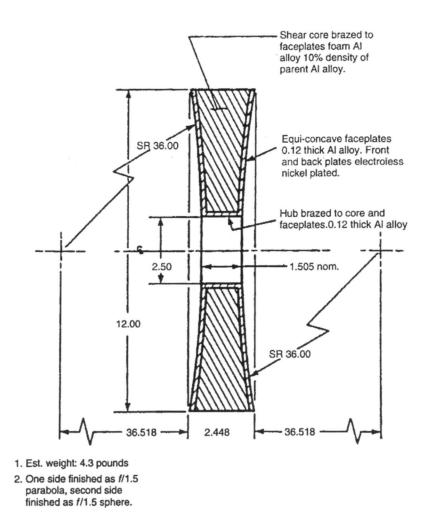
Design for a lightweight mirror with aluminum face plates and an aluminum foam core. Dimensions are in inches. (From Vukobratovich.⁵⁹)
